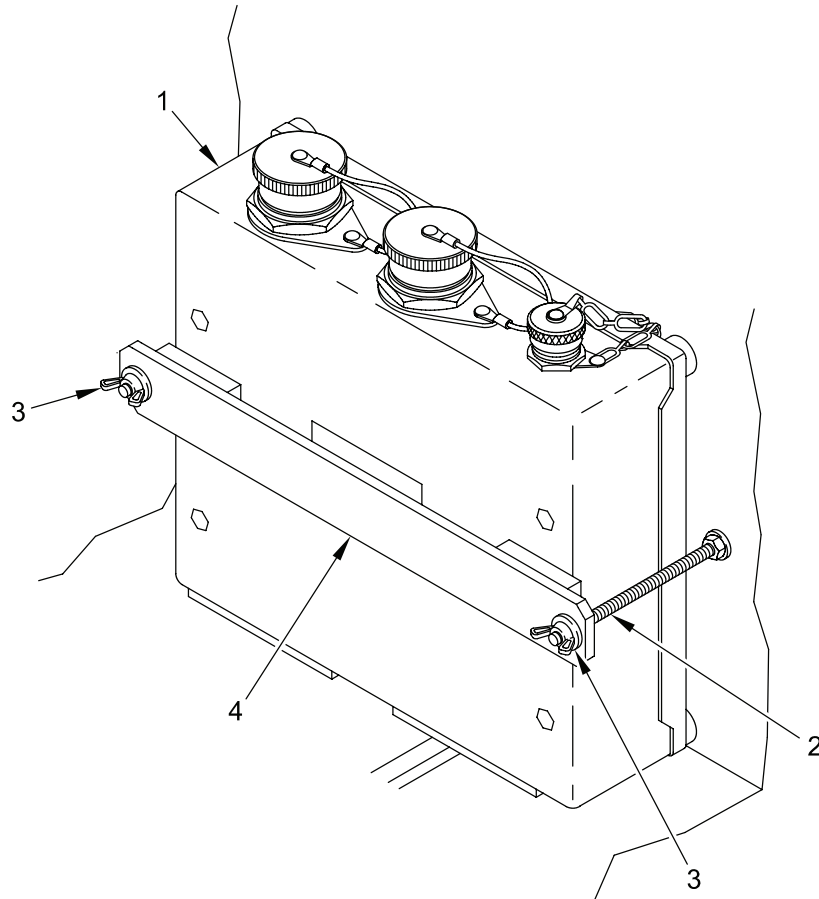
Removal of Wiring Harness W4 (Umbilical Cable W4).
